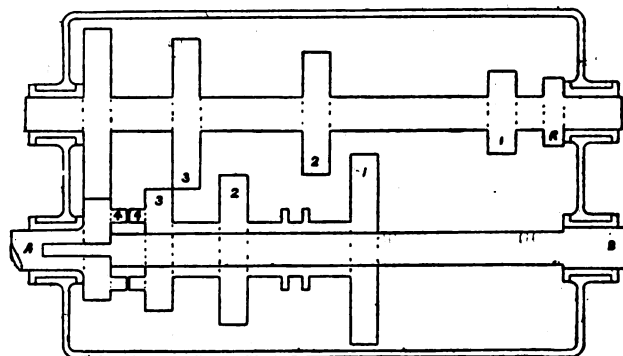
Sectional Plan View of the Old-Style Single Sliding Sleeve Gear-Box.
